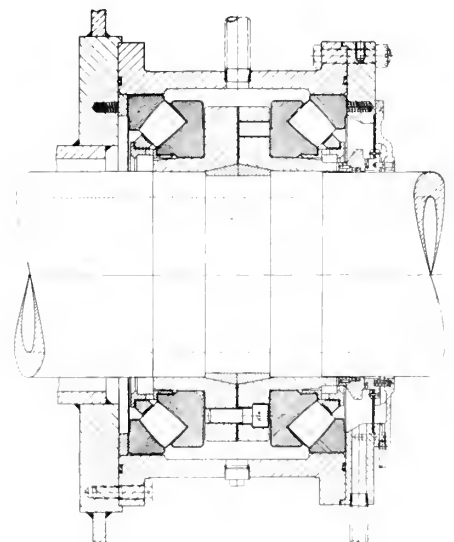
Design showing the mounting of the spherical roller thrust bearing in a stern tube. This design is used on several Coast Guard 255-foot cruising cutters.
